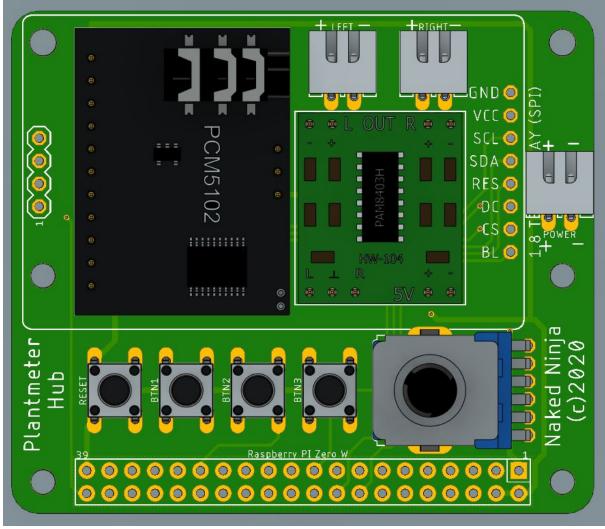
Toby PCB with JST connectors, tactile buttons, and potentiometer added.
